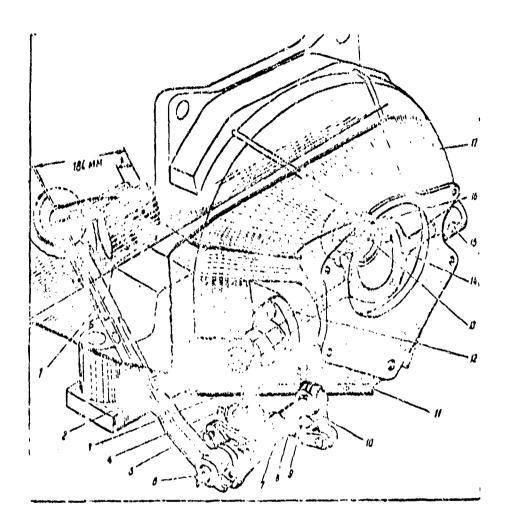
Clutch disengaging linkage of the ZIL-130 motor vehicle:
